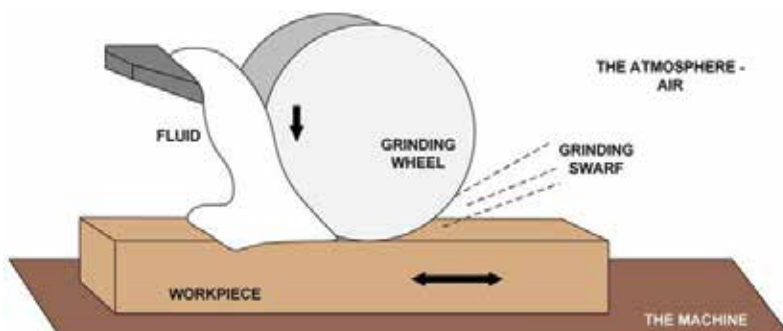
Simplified diagram of the grinding process, adapted from [2].
